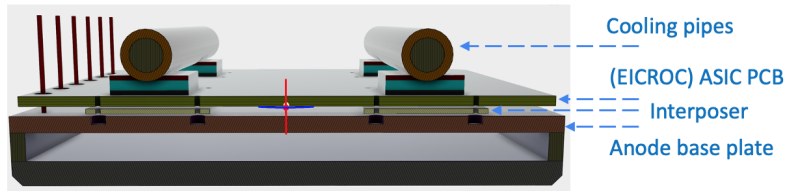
A cross-cut of an HRPPD assembly CAD model, with Samtec interposers and an ASIC PCB.
